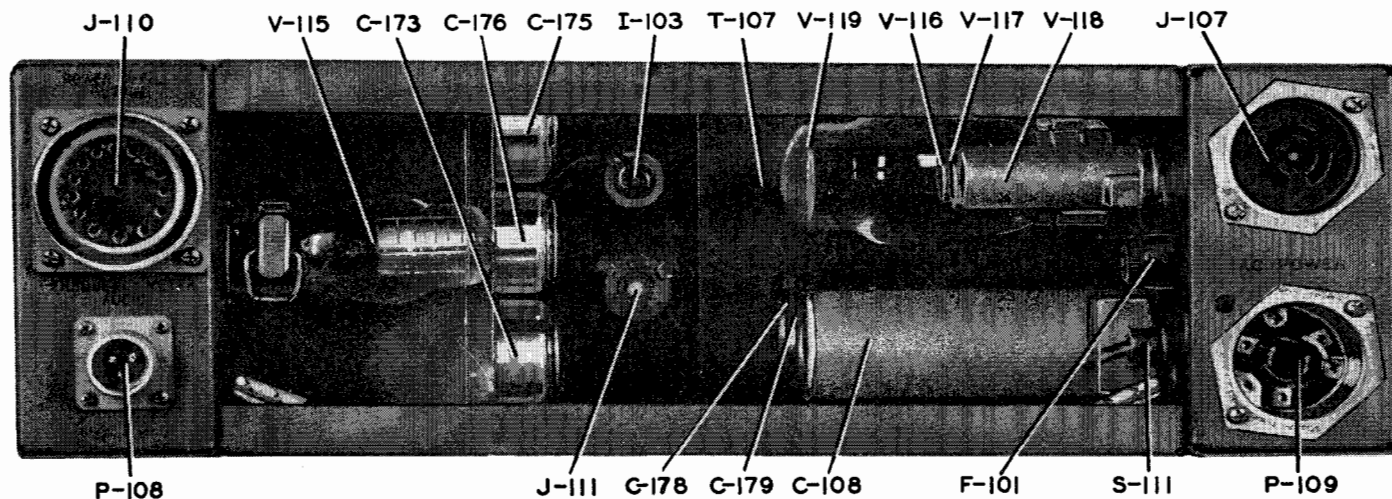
Keyer KY-30/GRT Power Supply Parts Arrangement, Rear
